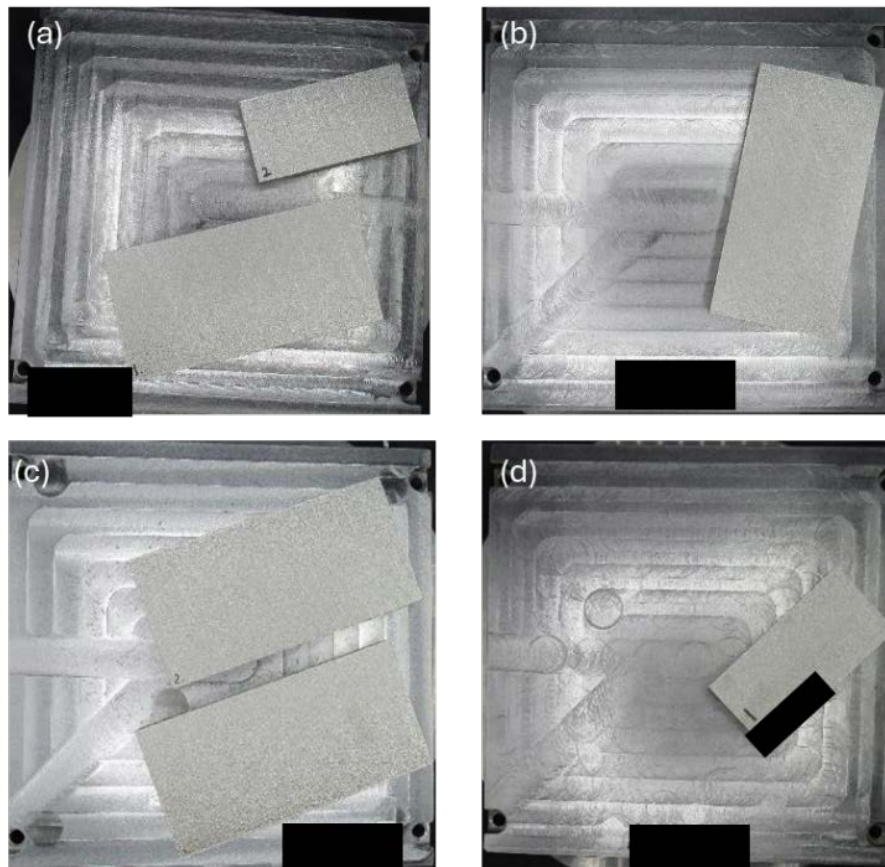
Images of four builds to produce the deliverables for milestone 2.4.4.4. (a) Haynes 282 weld plate 1 and weld test plate. (b) Haynes 282 weld plate 2. (c) IN740H weld plate 1 and 2. (d) IN740H weld test plate.
